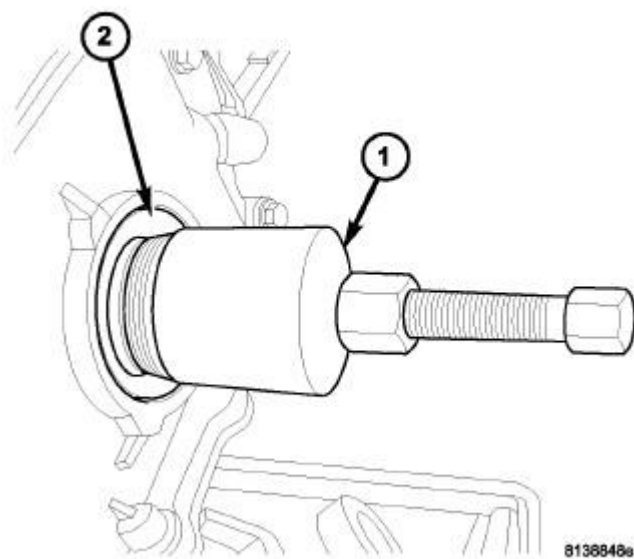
FRONT CRANKSHAFT SEAL REMOVAL
